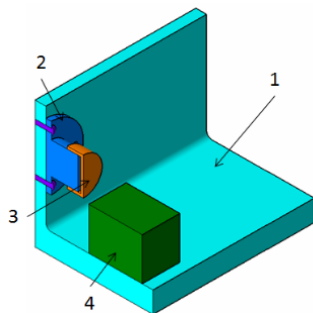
Cutaway of 4-Part Assembly subset with 4 attachments
